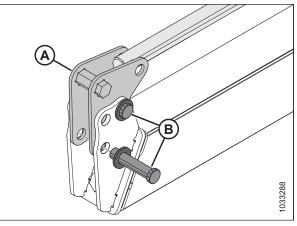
Double Reel, Right Arm – Rear (Canola) Position Shown
